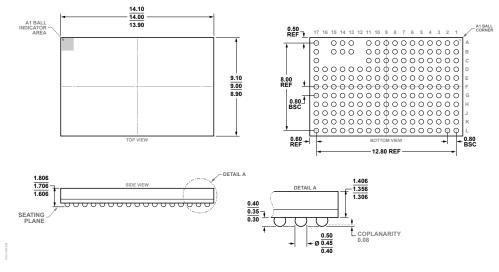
178-Ball Chip-Scale Package, Ball Grid Array (BC-178-2) Dimensions Shown in millimeters
